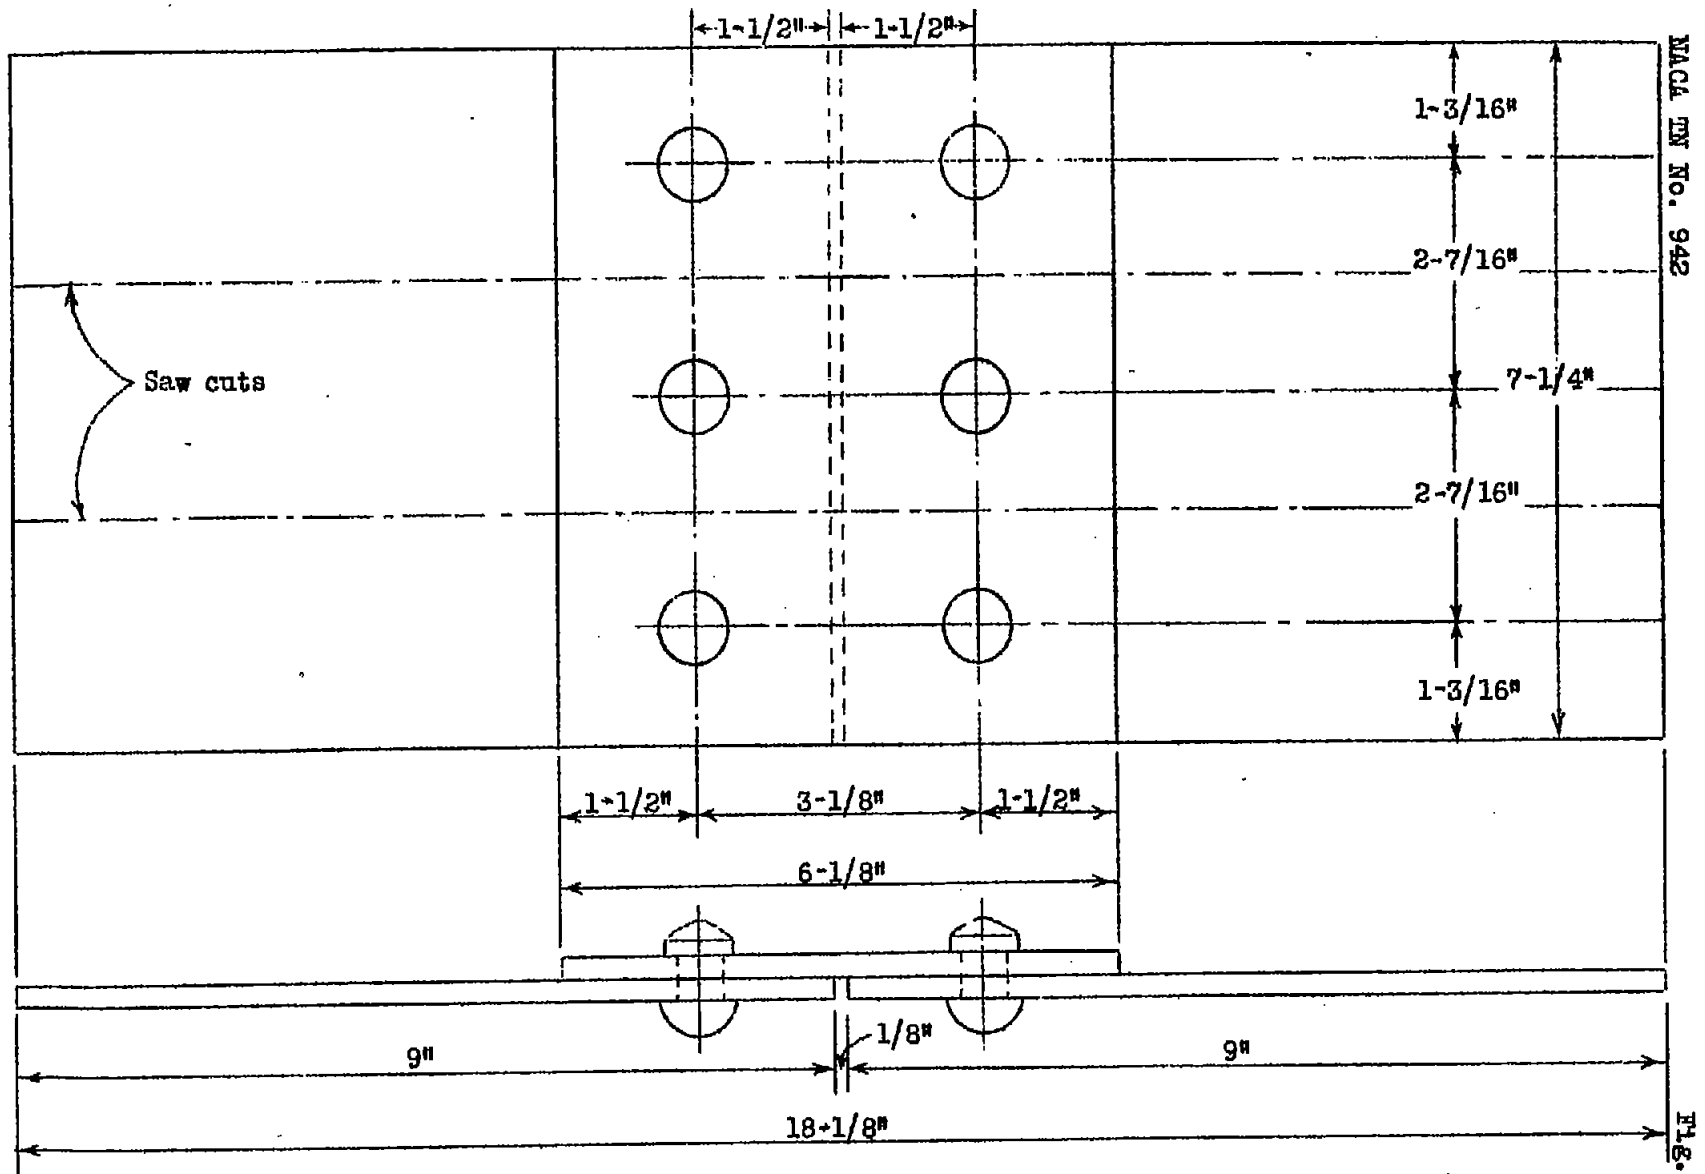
Specimen for single shear tests on driven rivets (1/2" dia.) all holes 33/64" dia.
